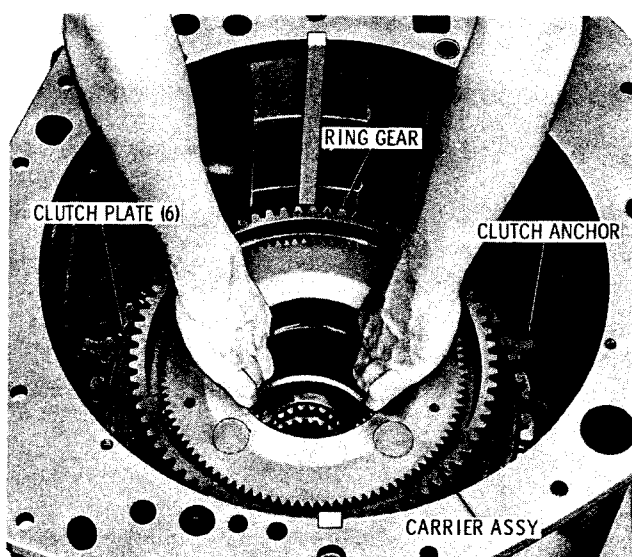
Installing intermediate-range planetary carrier assembly and ring gear
